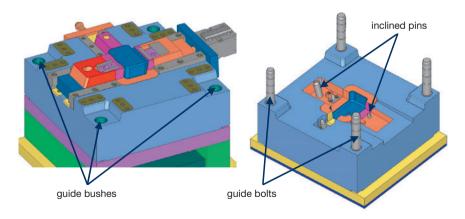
Guide bushes, guide bolts, and inclined pins
